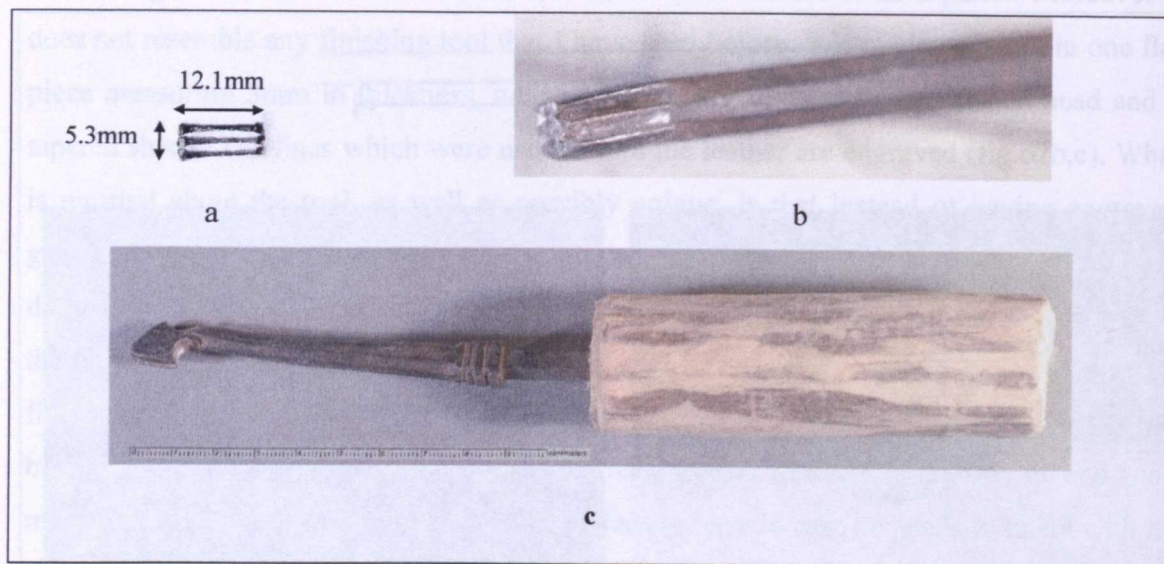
Tool 39: a) actual size smoke proof, b) close-up view of the two-line creaser, c) general view of the tool
